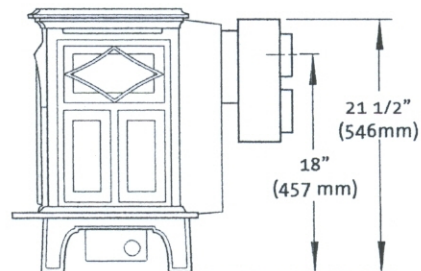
Co-Linear Adaptor dimensions with Plinth legs.
